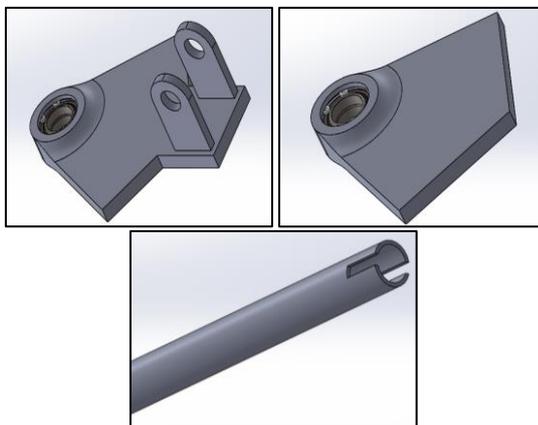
Lower and Upper attachment parts and slotted tube respectively of version 03
